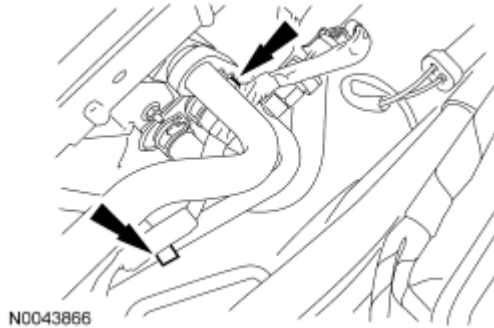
Locating A/C Pressure Transducer Electrical Connector
